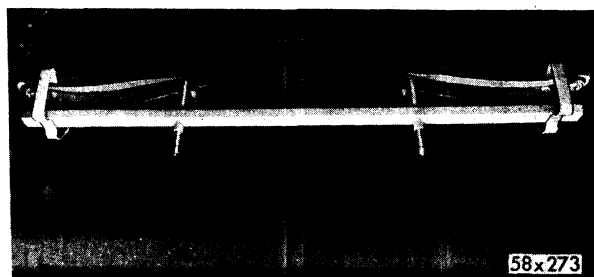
Front Suspension Height and Level Gauge Measuring Pins and Clips
